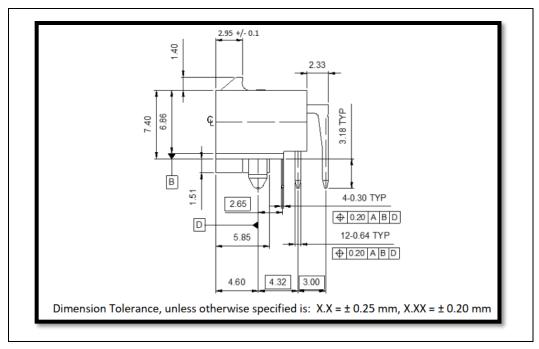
12V-2x6 PCB Header – Side View, Highlighting Contact Dimensions
